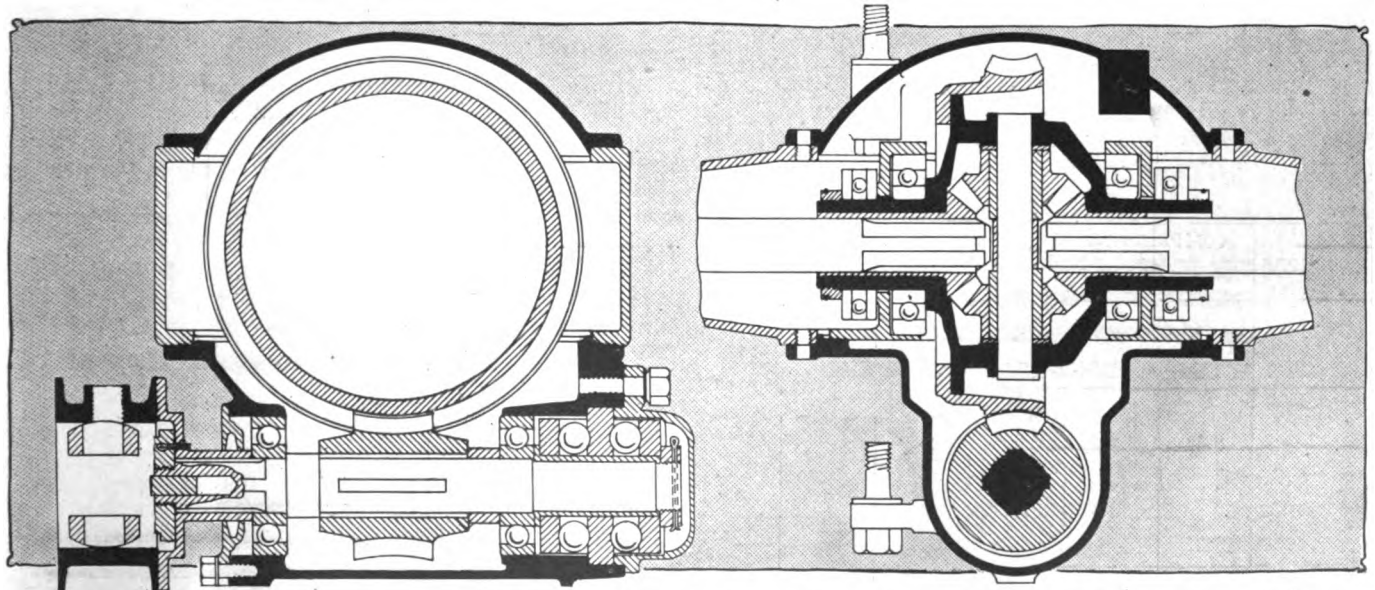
Longitudinal section through Thornycroft rear axle adapted for worm drive
